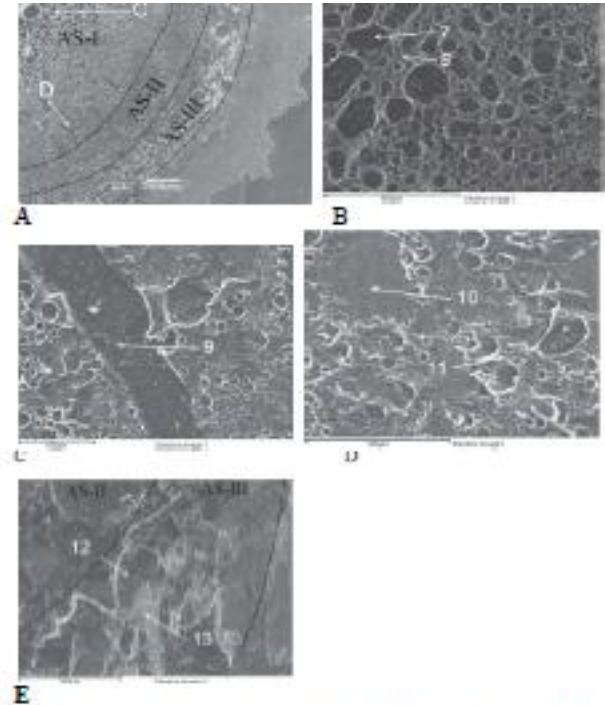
Fracture surface of the Zn coated steel interlayer at Al side (produced in a weld made using 28 kA). A— Overview; B — details of region C from
